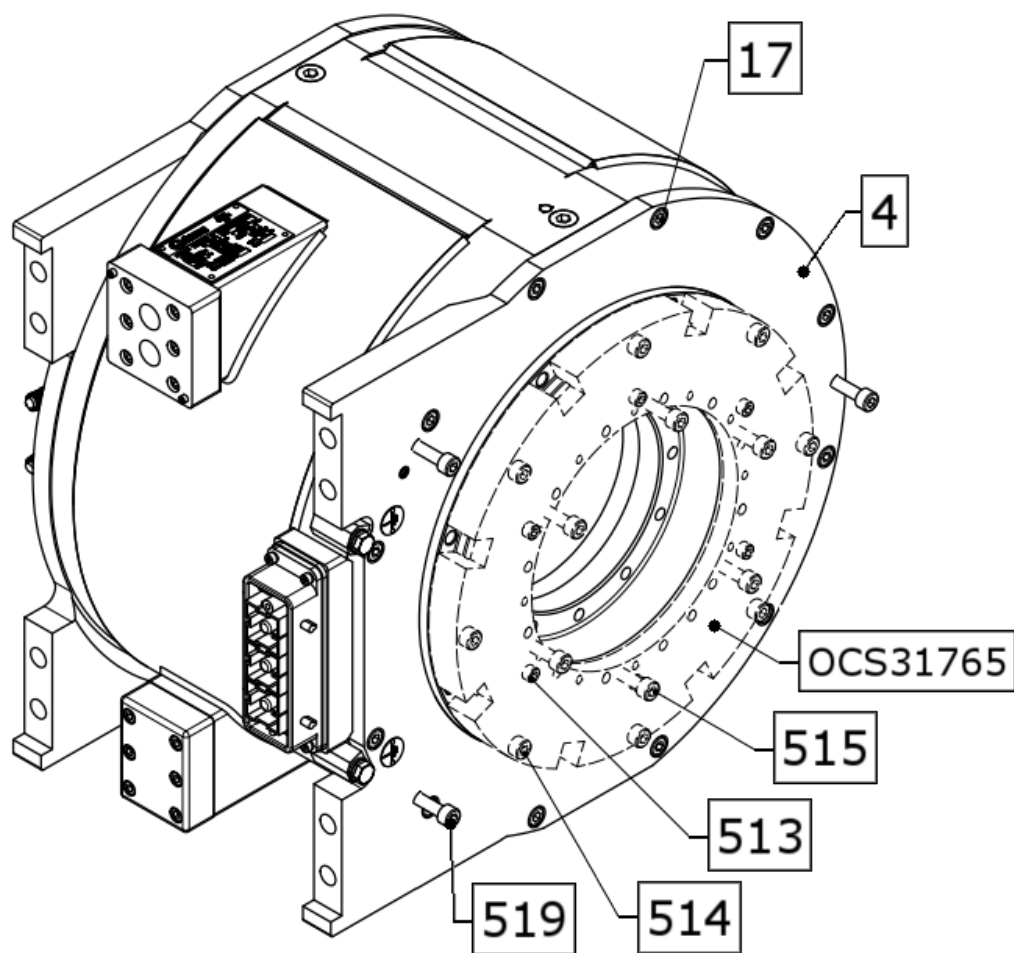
Disassembly of adjustment screws (49) and fixture installation
